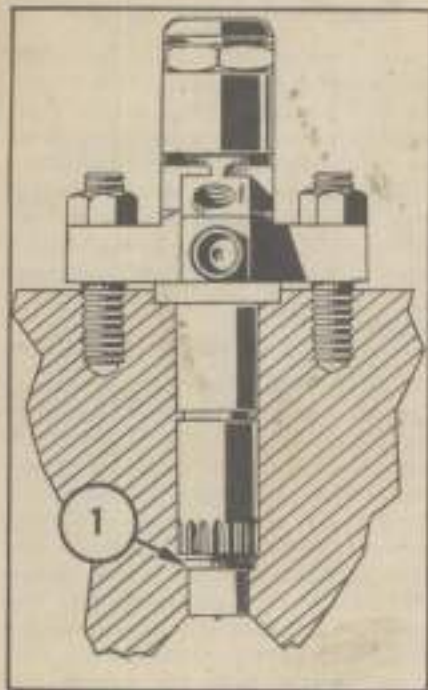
Sectional view showing the injection nozzle installation. Whenever the nozzle has been removed, always renew the copper gasket (1).
